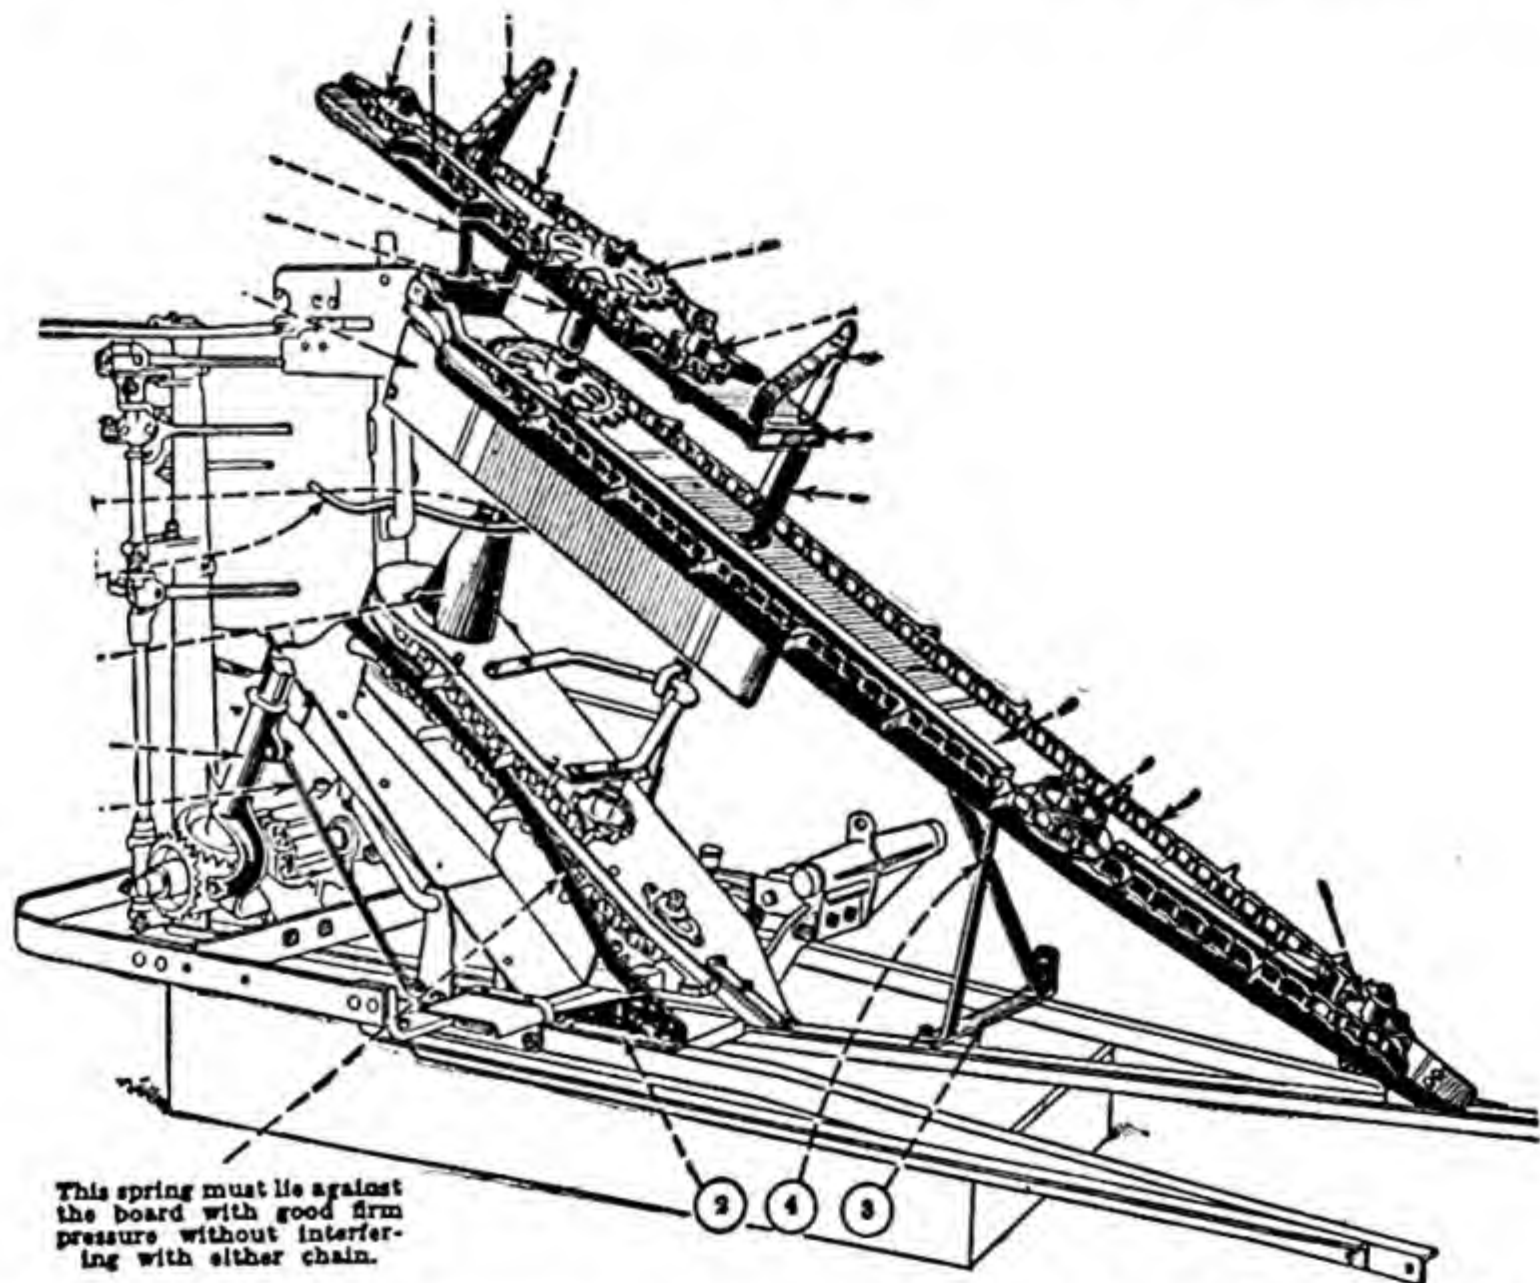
Side view of upper and lower gathering chains on left side of binder.
